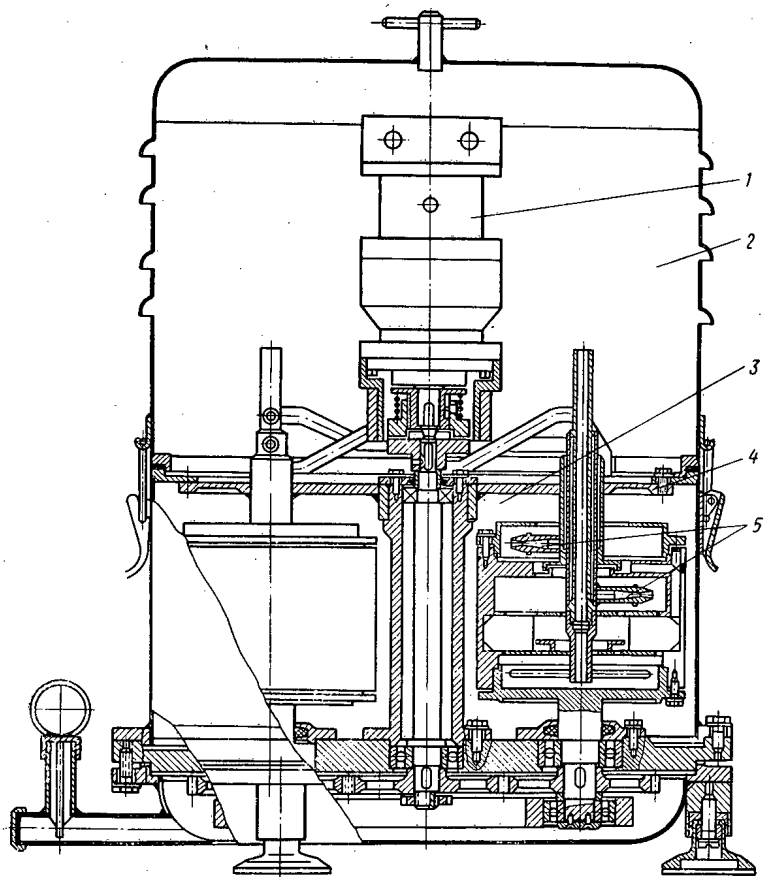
MTsÉ-300 miniature centrifugal extractor powered by G15-2 hydraulic motor.
